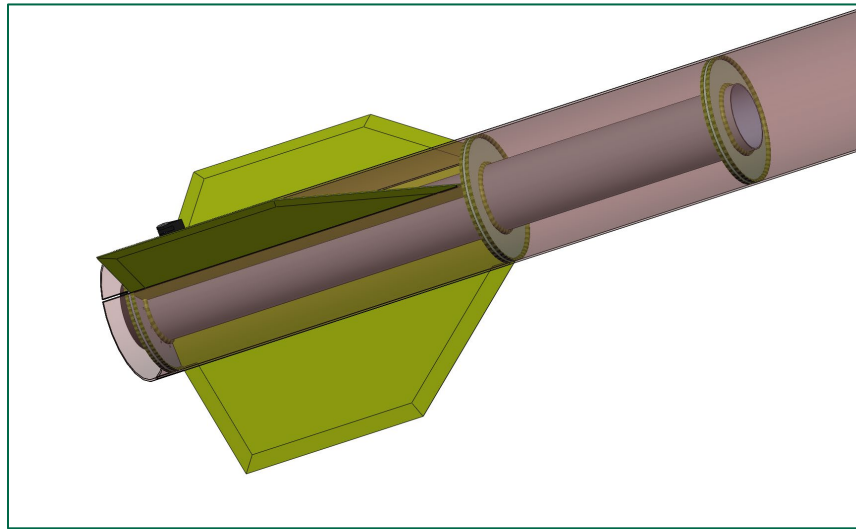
Fin can assembly with centering rings (epoxy fin fillets not shown).
